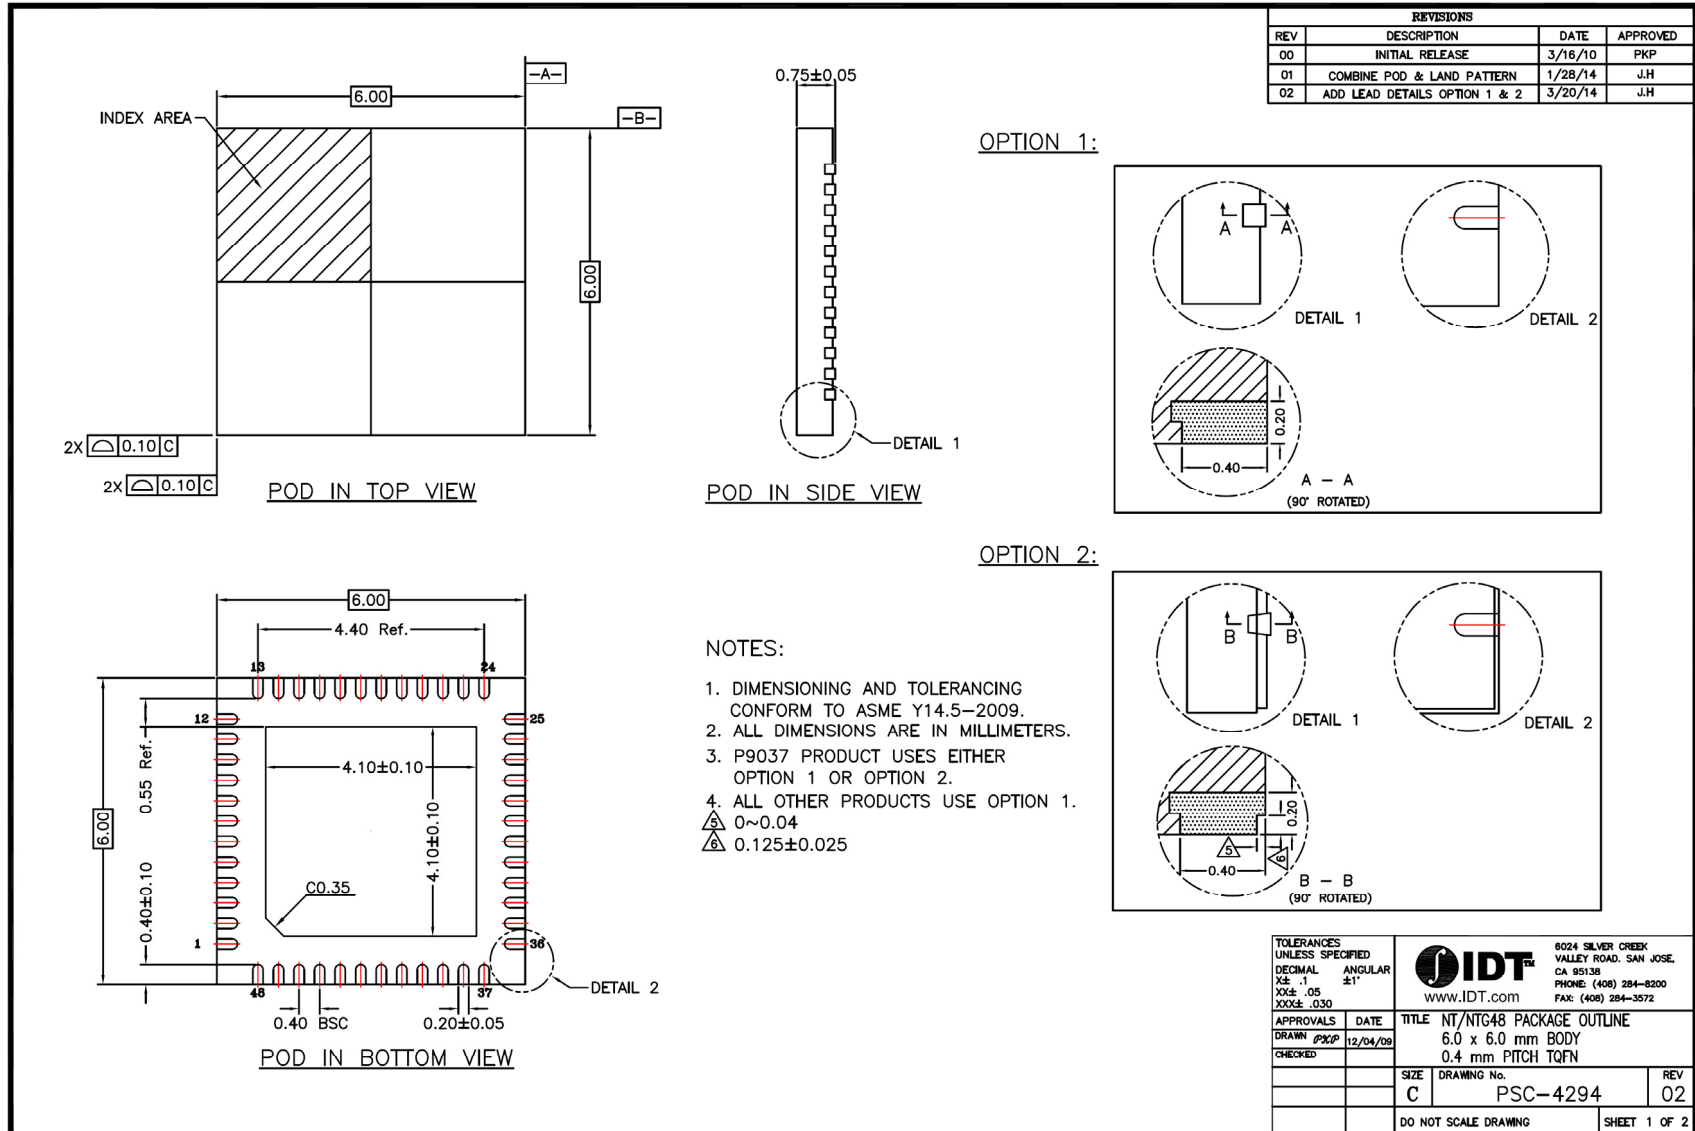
P9030 Package Outline Drawing (NTG48 TQFN-48L 6.0 mm x 6.0 mm x 0.75 mm 48L, 0.4mm pitch)
